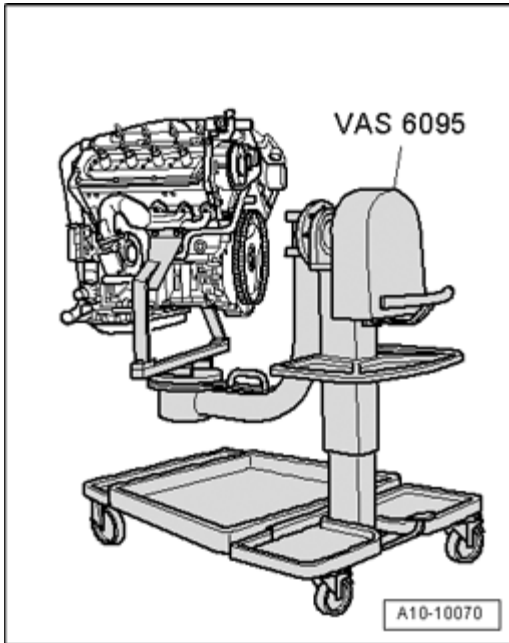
Securing Engine With Transmission Holder VAS 6095
